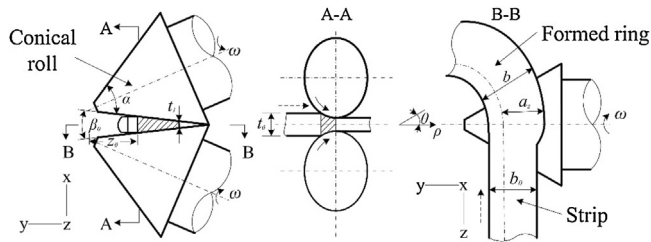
Illustrated process of wedge-shaped in-plane ring roll-bending of a metal strip.
